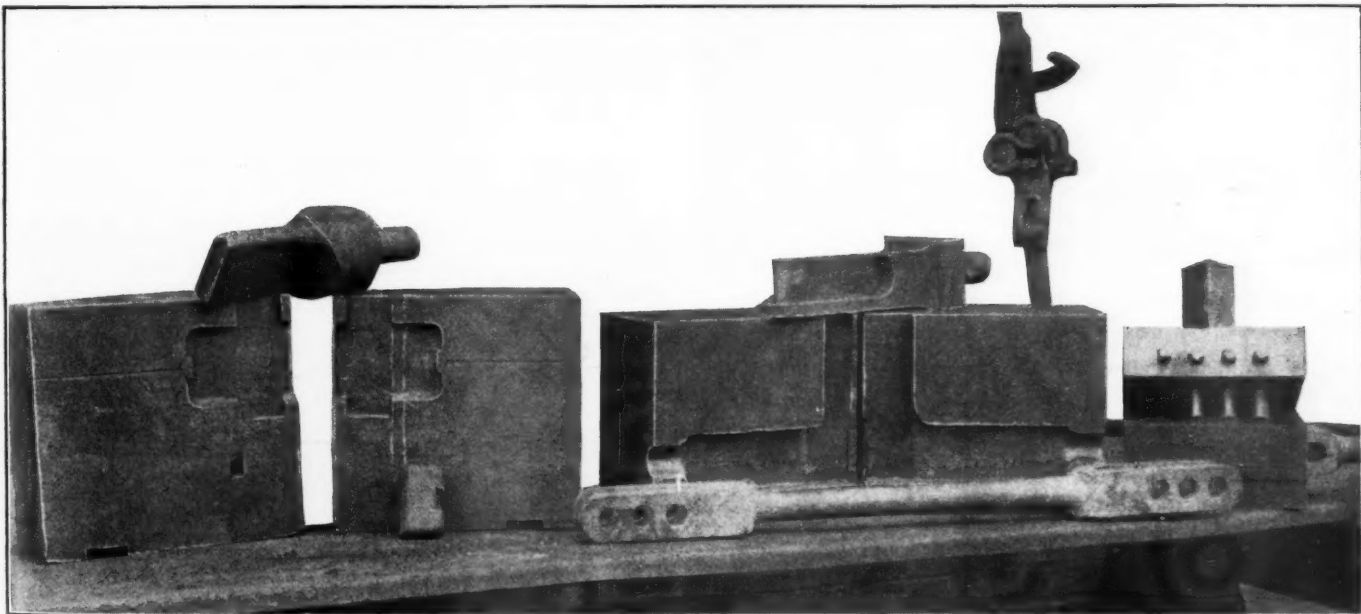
Dies for Forming Spring Hanger Gibs, Welding Bottom Brake Rods, and Punching Them, and a Device for Bending S-Hooks.
